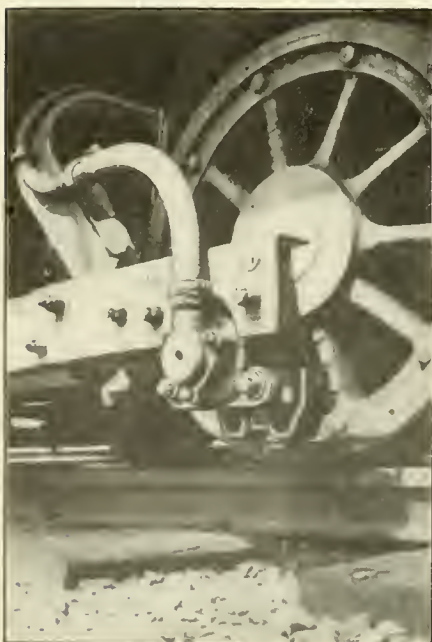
VIEW OF AIR VALVE SHOWING V-SHAPED CASTINGS.
